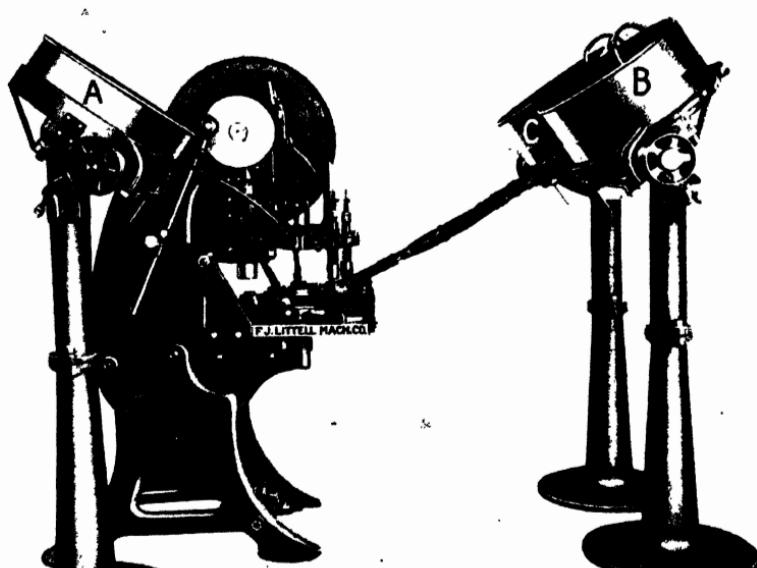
Punch press equipped with gravity slide feed. (*Courtesy of the F. J. Littell Machine Company.*)
